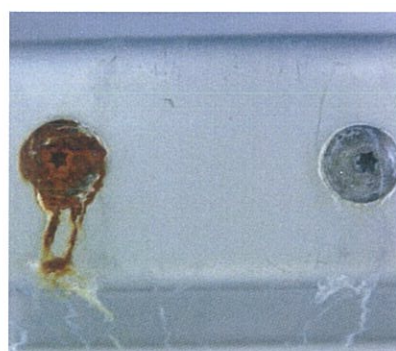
Screws after neutral salt spray test: carbon steel screw (left) and austenitic stainless steel (right)
